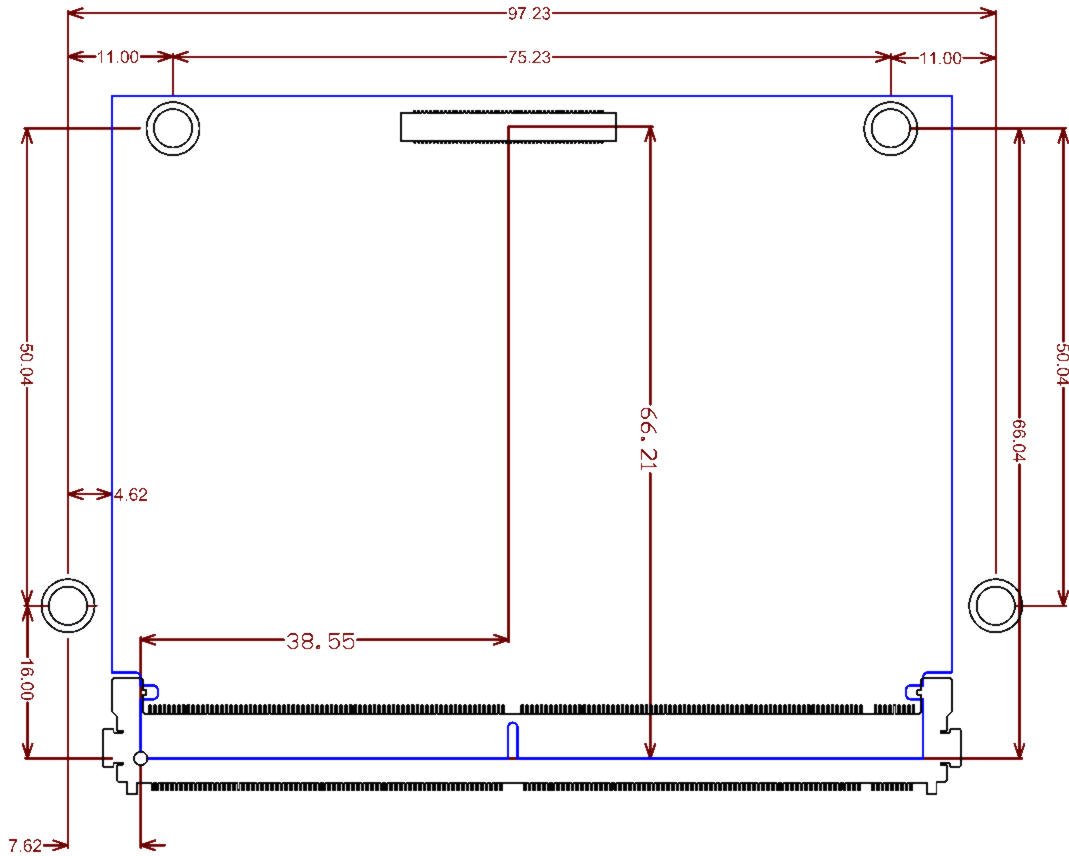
MitySOM-AM57F Carrier Card Outline with heat spreader mounting holes.
